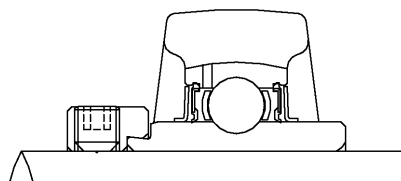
Lubrication-free type insert bearing unit (G00 specifications)
